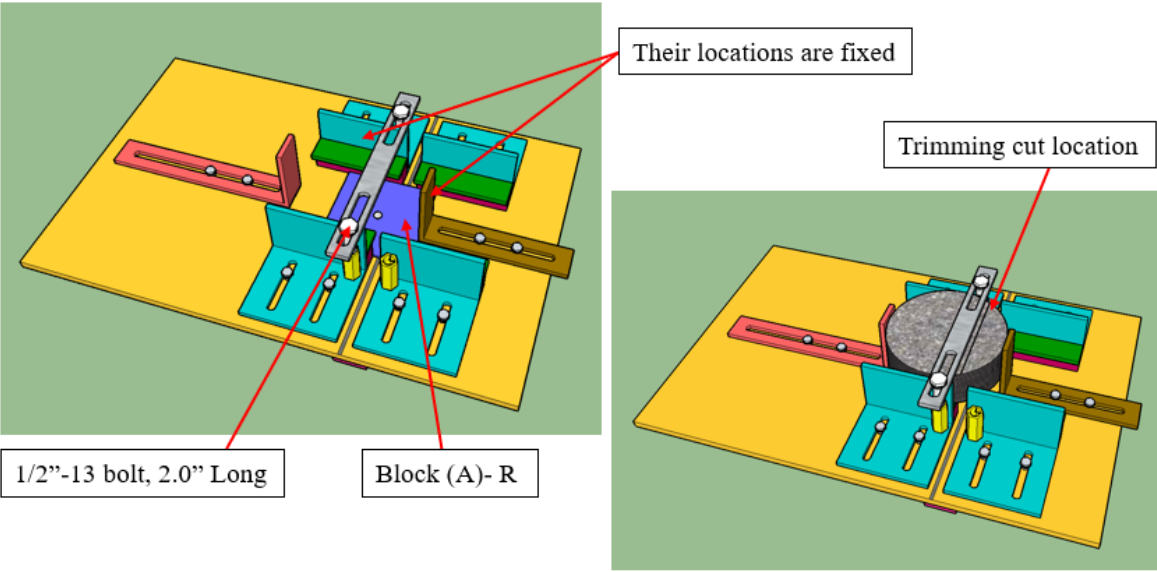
Illustration drawings to the first trimming of RH specimens.
